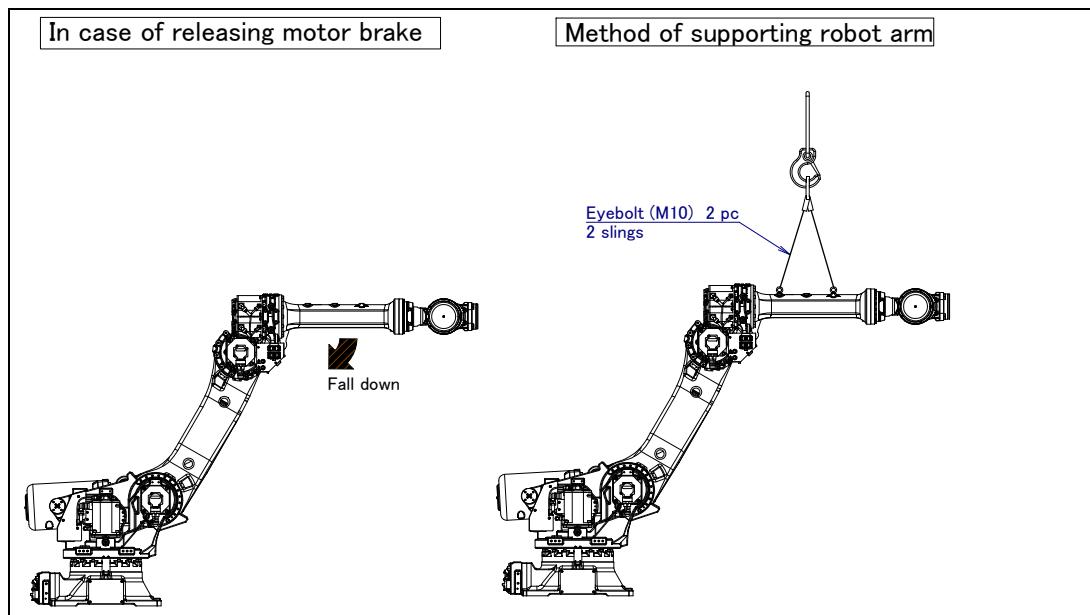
(b) Arm operation by the release of J3-axis motor brake and measures
